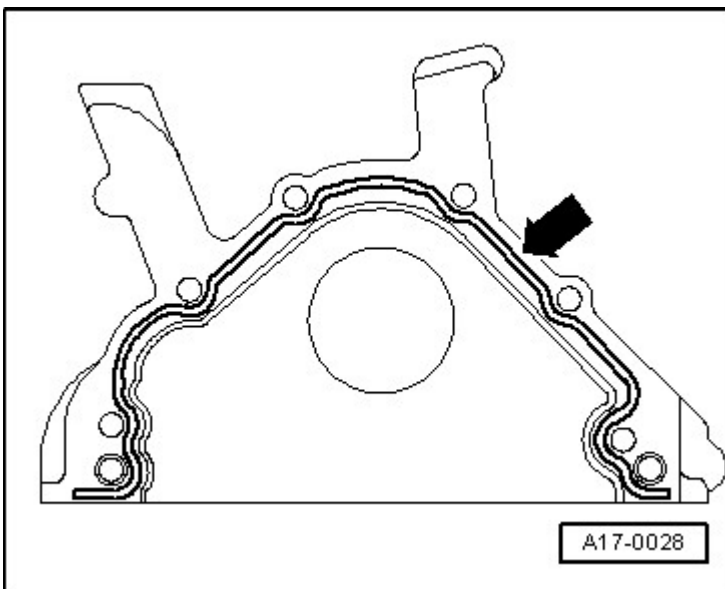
Applying Silicone Sealant Bead To Clean Sealing Surface Of Sealing Flange
